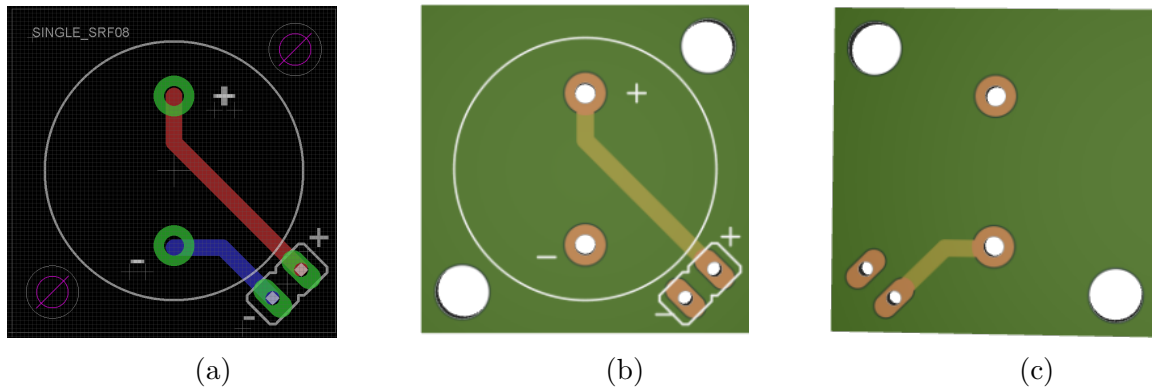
(a) SONAR Sensor PCB layout. (b) SONAR Sensor PCB front view. (c) SONAR Sensor PCB back view
